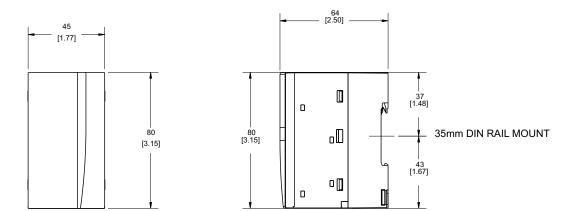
Measurement Module—C445MA... Mounting Dimensions
